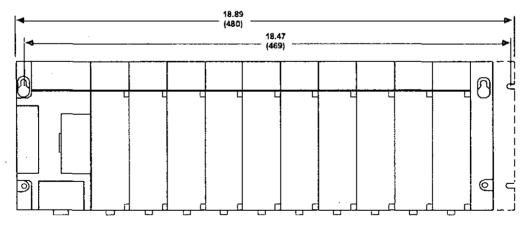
Dimensions for 19-inch Rack Mounting Using IC693ACC308 Adapter Bracket
